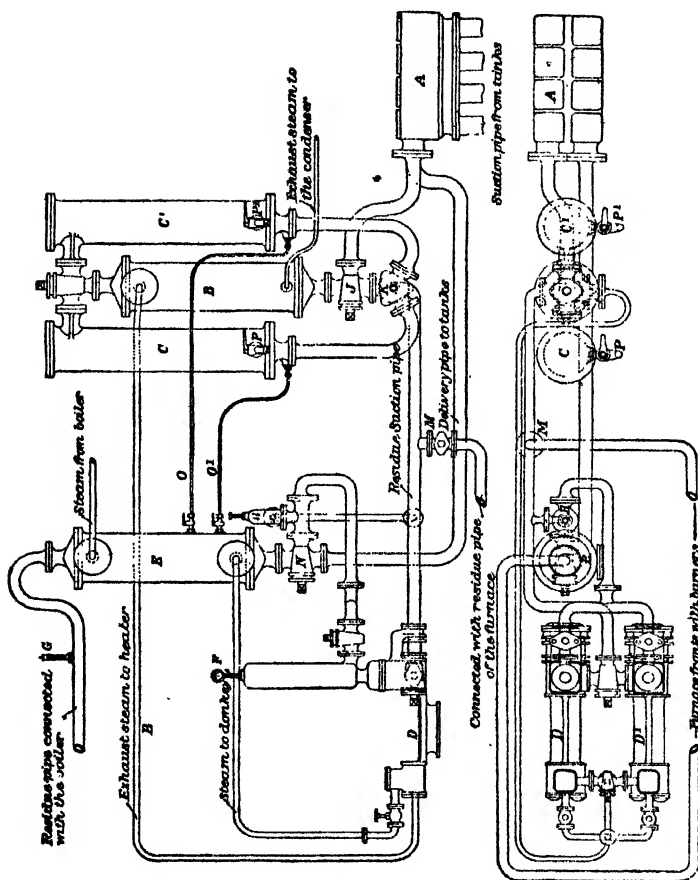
Arrangement of heating, filtering, and pumping apparatus used on the Meijer oil-firing system
